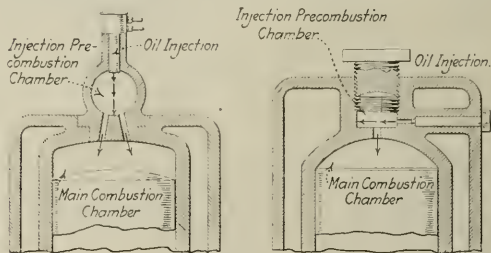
NYDAHL DIVIDED COLD COMBUSTION CHAMBER
